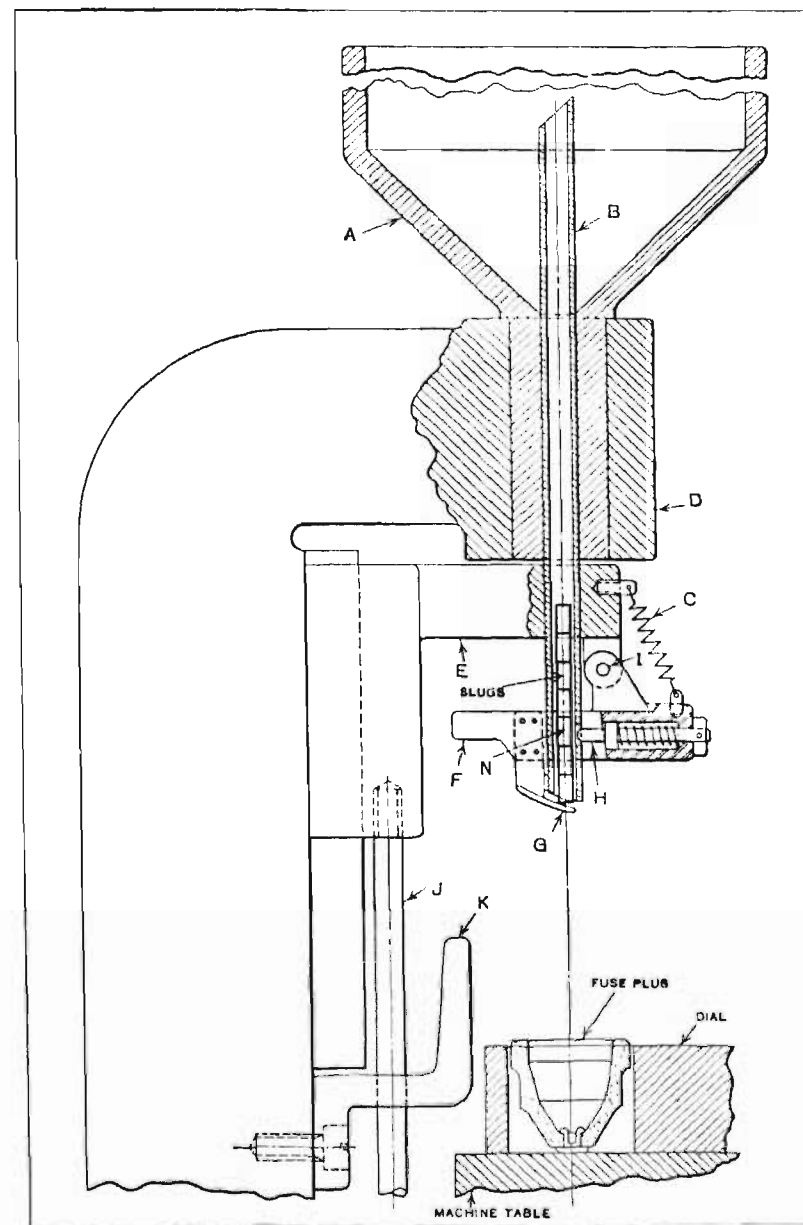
Hopper which Delivers Two Solder Slugs to Each Fuse Plug in Soldering Machine Dial
